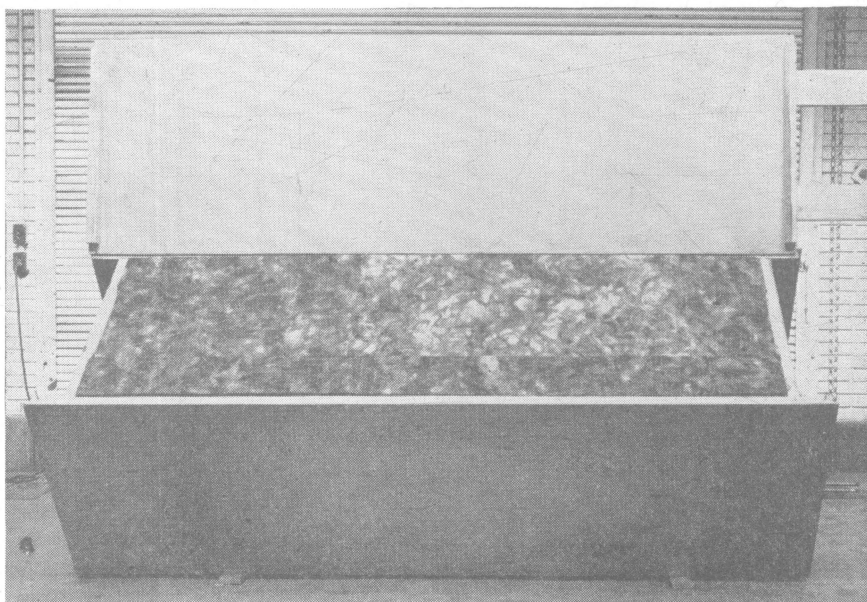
Bottom insulation in place ready for bottom panel. Two 2" x 6" skids are fastened to bottom panel before it is fastened in place.
